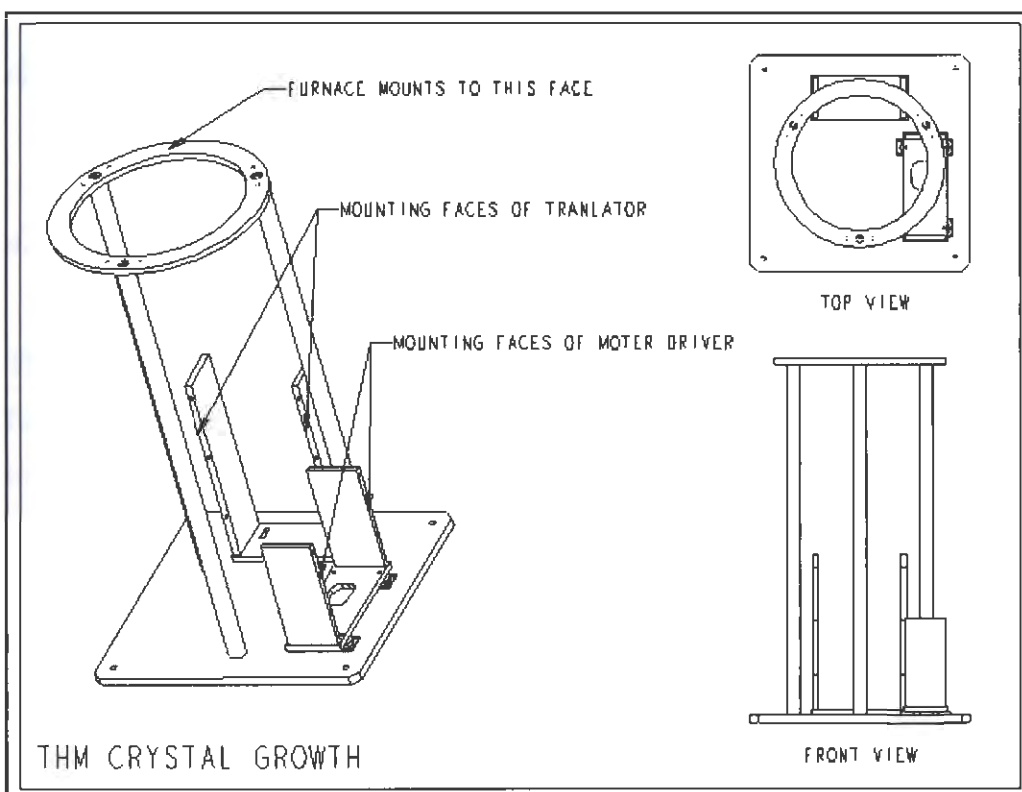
Furnace Stand with Mounts for Motor Driver and Translator
